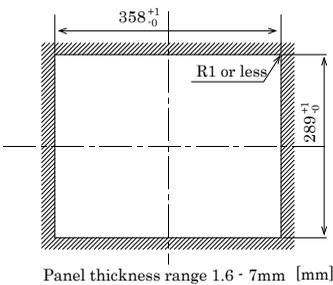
FPD-H71XT-DC1 [15 inches] Panel Cut Dimensions and hole position for stud
